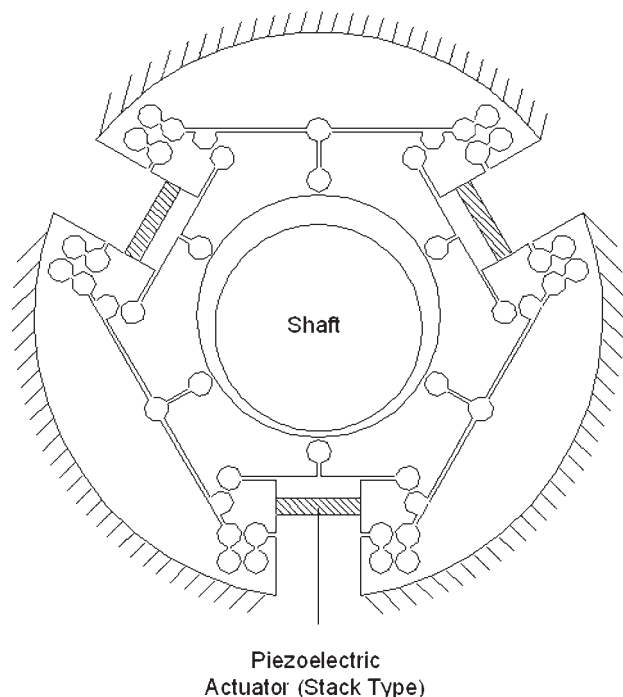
Bearing with piezoelectric actuators and shaft (not to scale)
